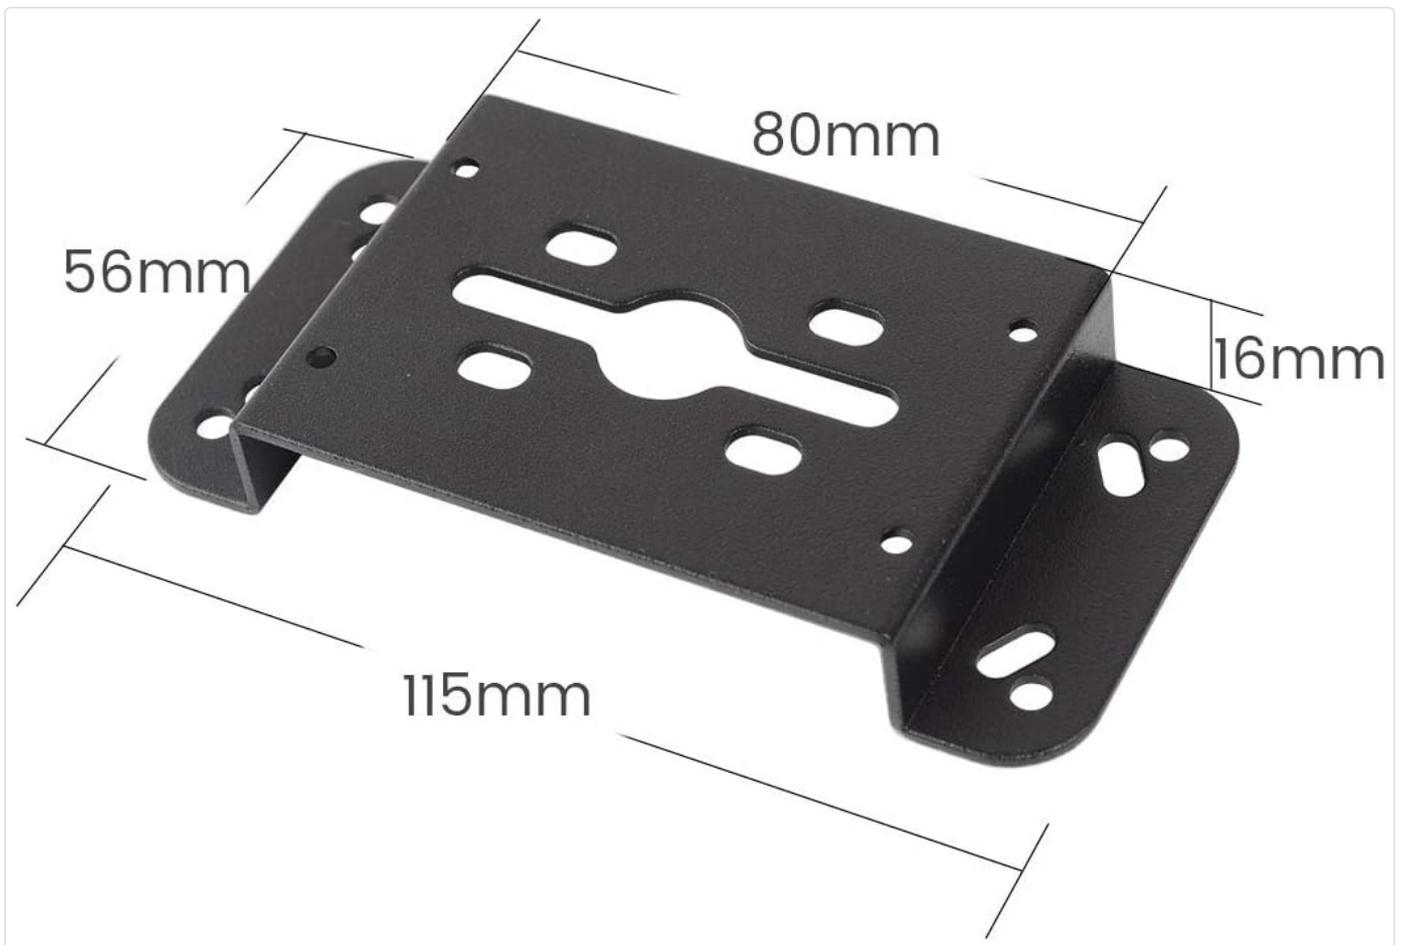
Dimensions of the Haloview VF01 Bracket. This image provides a detailed view of the bracket with measurements (80mm, 56mm, 115mm, 16mm) to assist with pre-installation checks.
